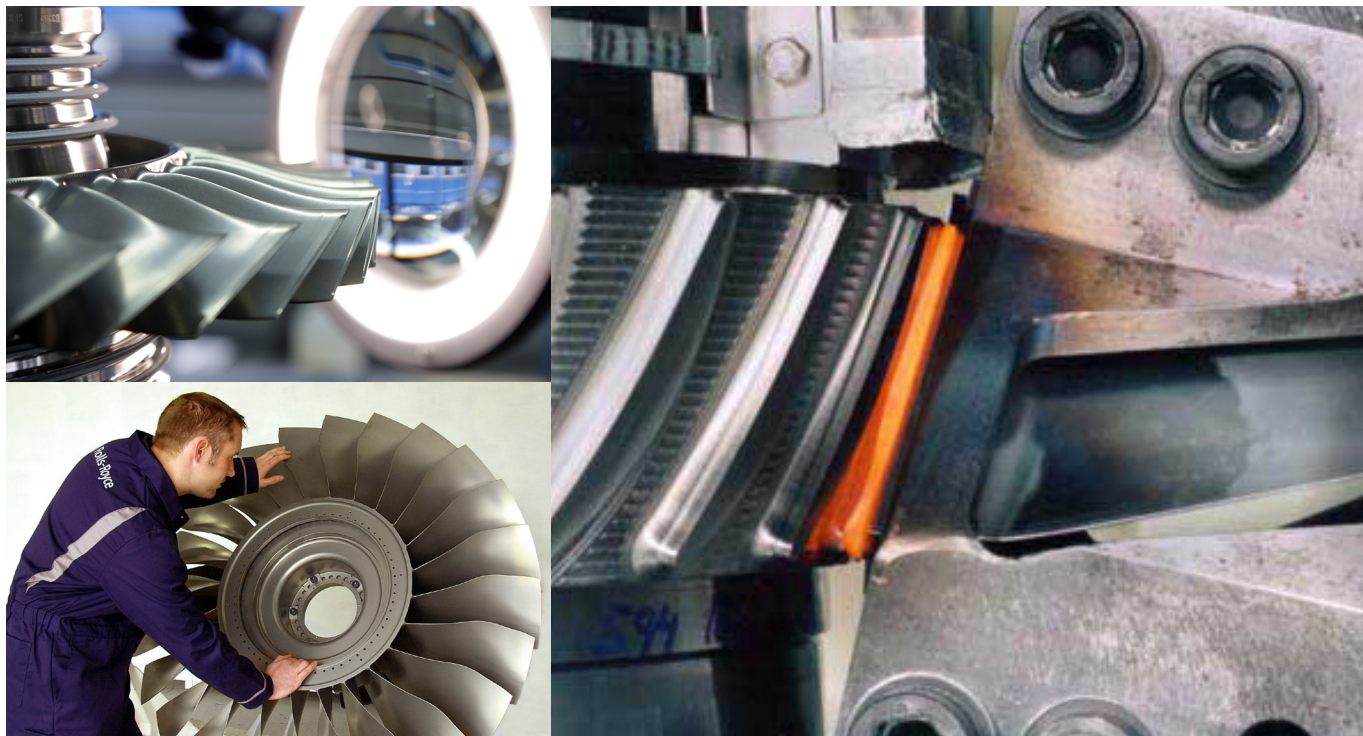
An example of linear friction welded bladed disks or ‘blisks’ used in the compressors of turbfan engines
